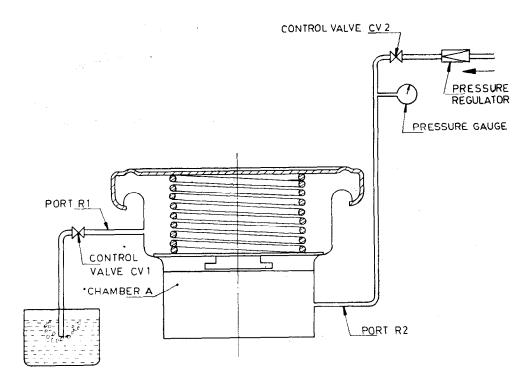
Arrangement for Main Valve Opening Pressure Test
